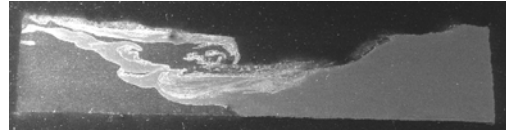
(a): Macrograph of weld produced at 600 rpm and 50 mm/min.
